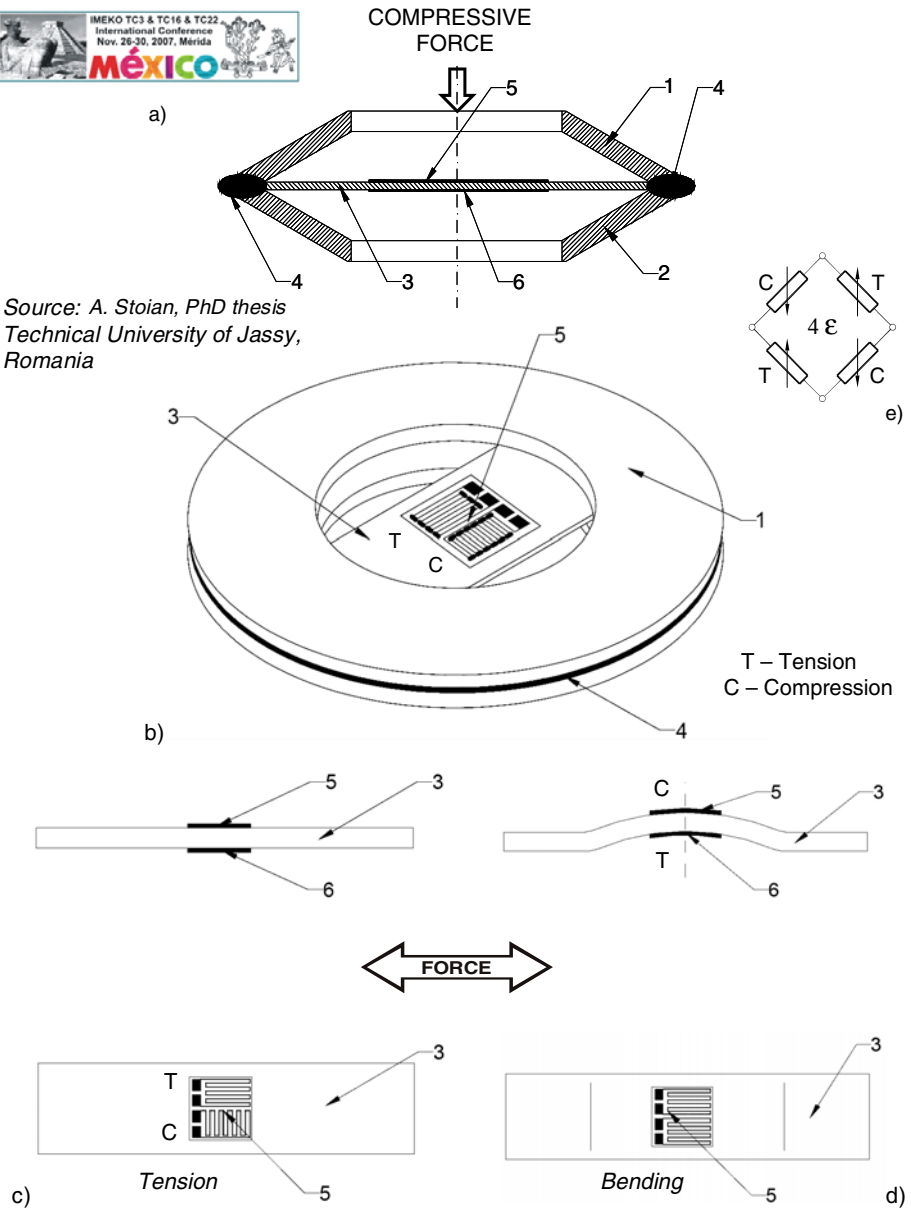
Tandem of welded spring discs transforming the vertical compression into horizontal tension: a) section view and b) isometric view. Sensing strip with strain gauges subjected to tension (c) or bending (d). e) Wheatstone bridge for compressed (C) and tensioned (T) strain gauges.
